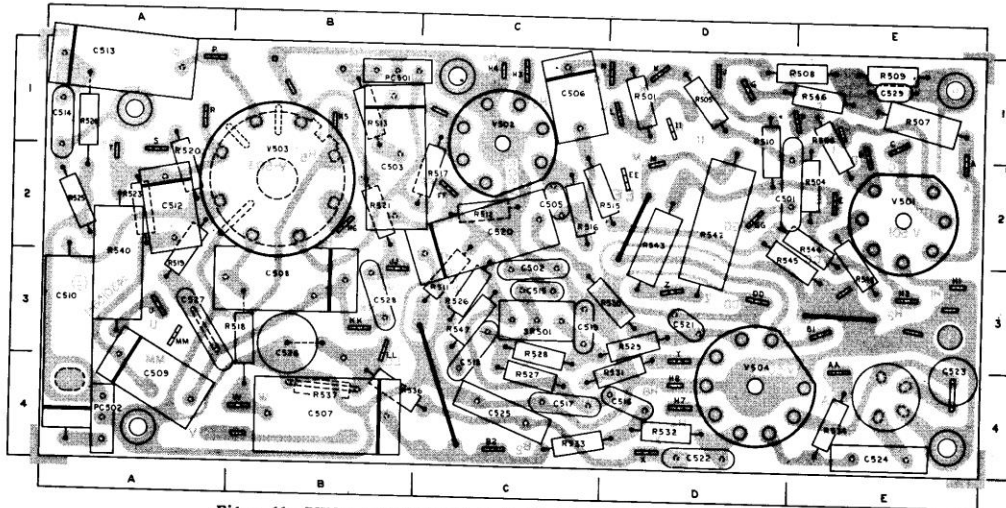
PW500 Sealed Circuit Deflection Assembly Composite Diagram
